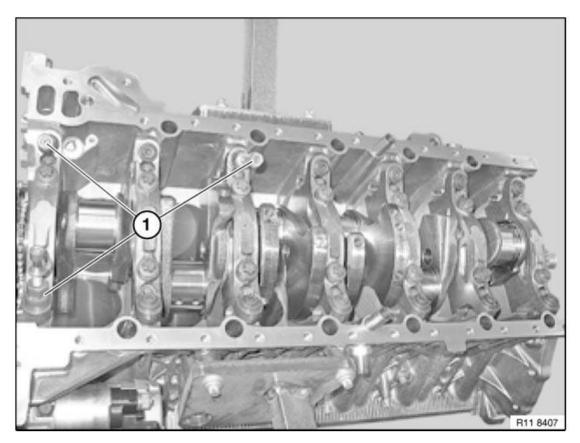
Identifying Main Bearing Taper Screw Tightening Sequence Courtesy of BMW OF NORTH AMERICA, INC.
